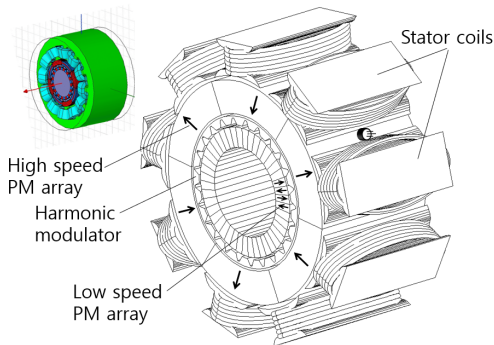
Overall sample layout of the magnetic geared motor composed of three pole PMSM and concentric magnetic gear
